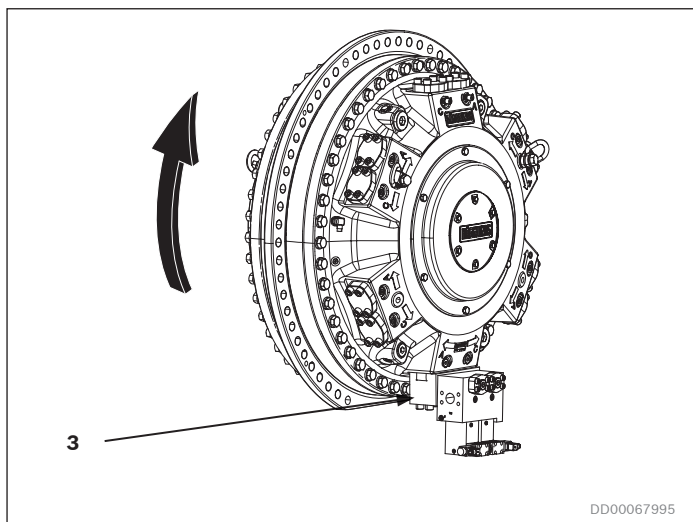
CBM valve mounting position for counter clockwise drive shaft rotation as viewed from motor shaft side. INL (A) port on valve connected to A port on motor
